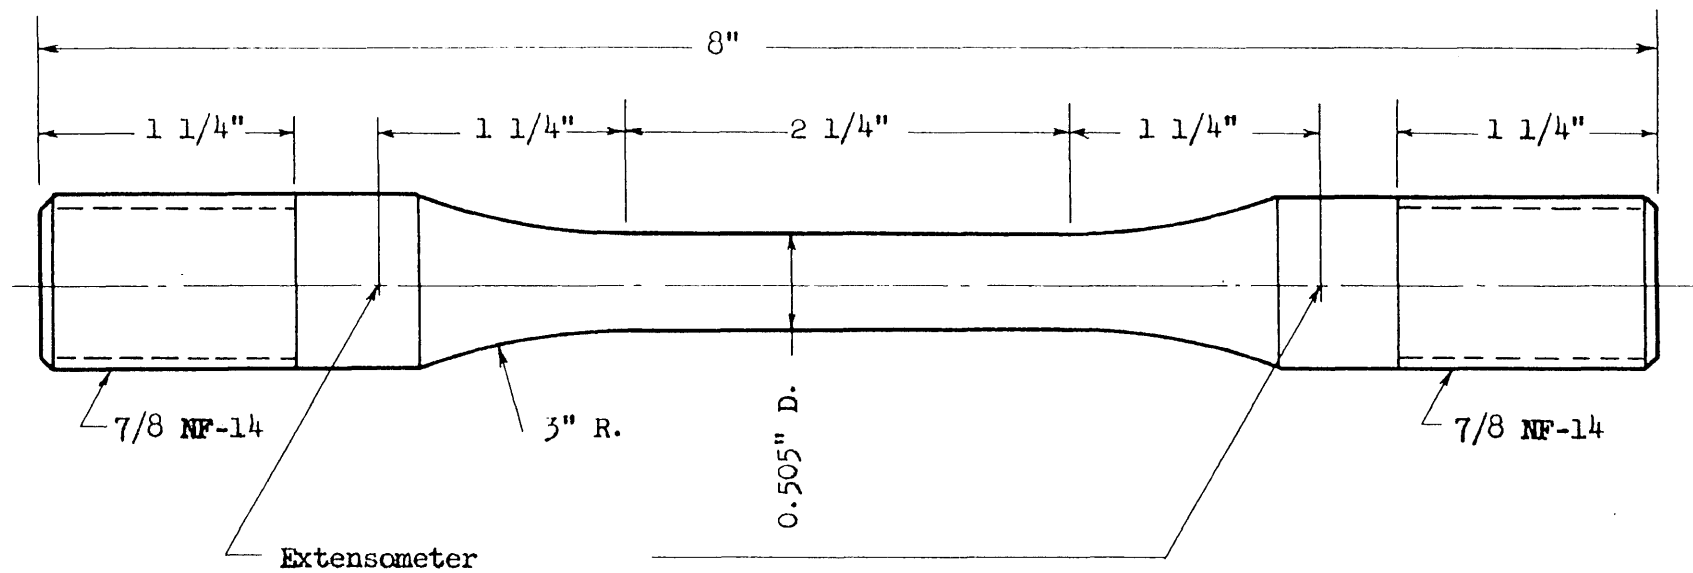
DIMENSIONS OF TENSILE SPECIMENS
